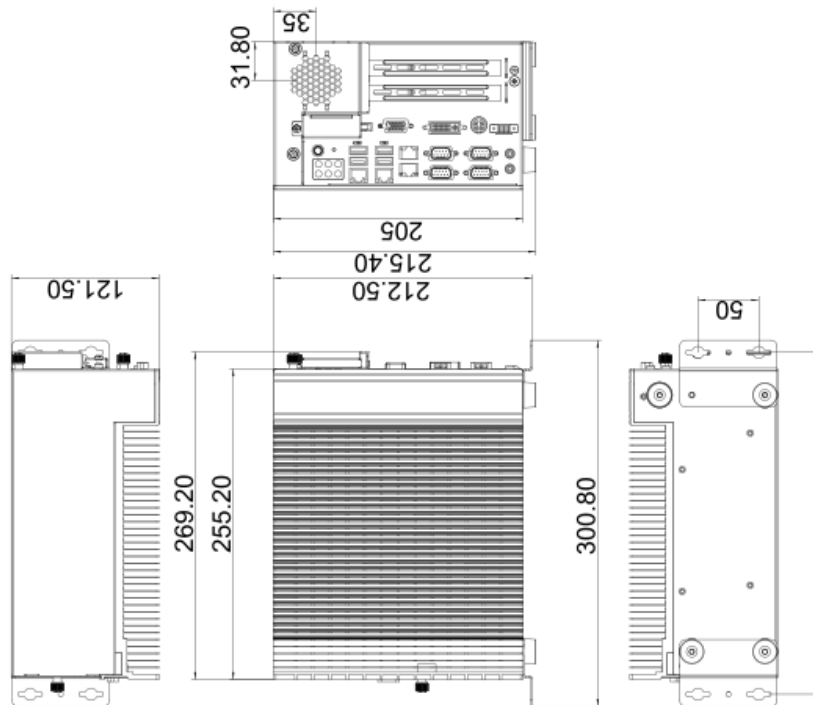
2-slot TANK-860-HM86 Physical Dimensions (millimeters)
